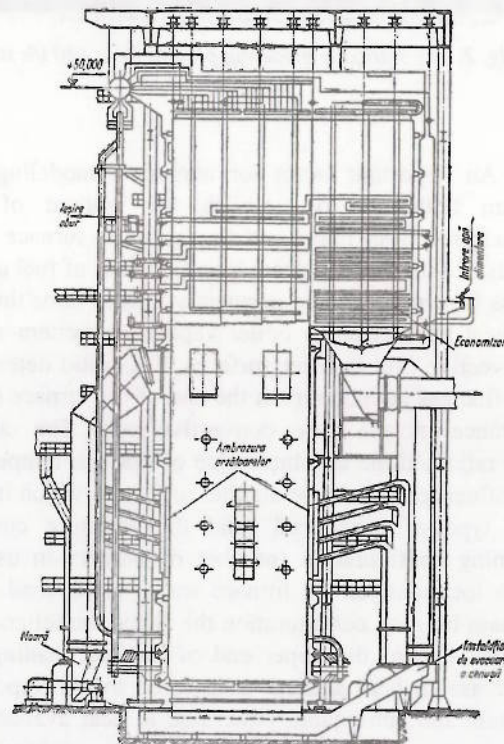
Draft for 420 t/h, lignite firing, drum type, steam boiler.
